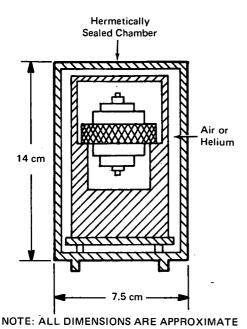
Oven Assembly Mounted in Hermetically Sealed Chamber
